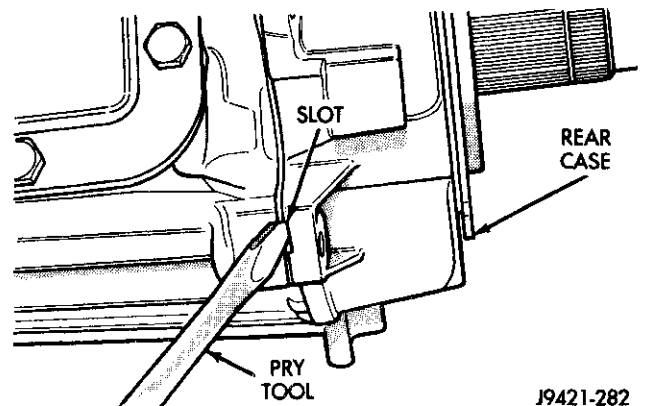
Loosening Rear Case (Breaking Sealer Bead)
